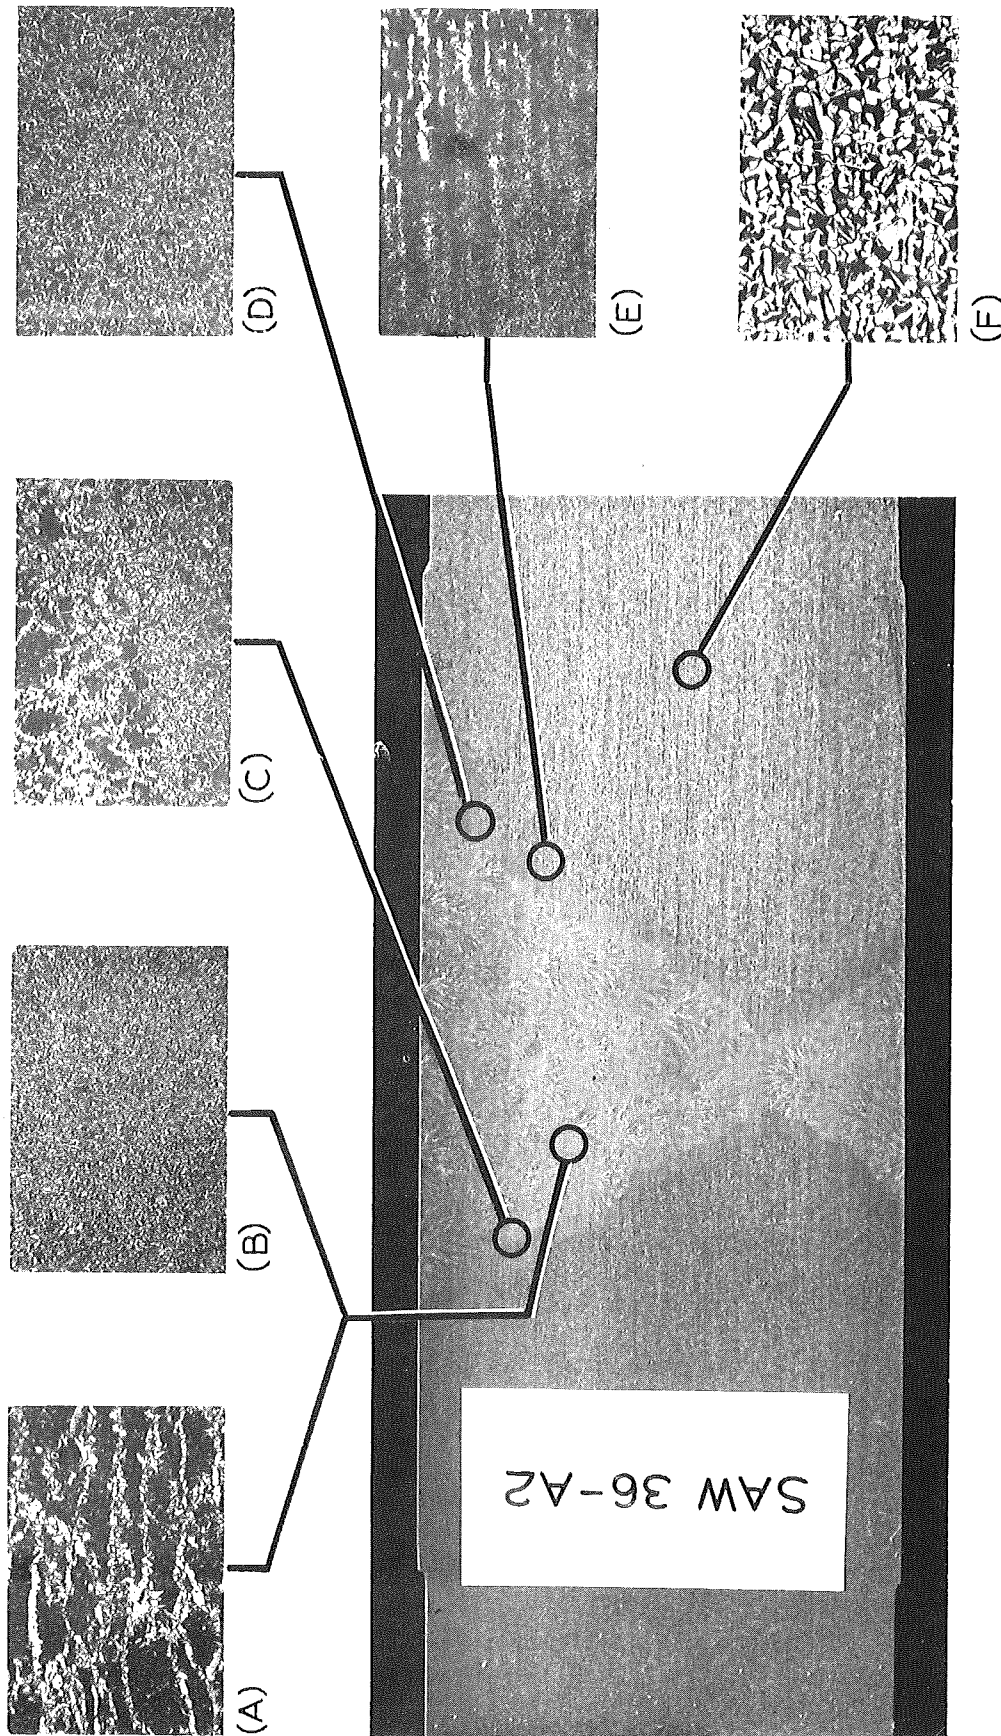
Submerged arc weld by Fabricator A on 3-in. A 36 steel. Microstructures shown are: A) as deposited weld metal, B) weld metal refined by a subsequent pass, C) fusion line (HAZ on bottom), D) HAZ beyond fusion line, E) interface between HAZ and base metal, F) unaffected base metal. (Microstructures at 100x, etchant 3 percent nital.)
